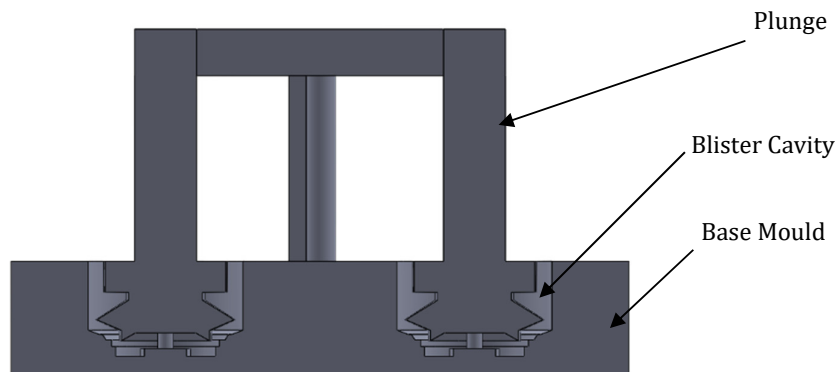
Illustration of the plunger and a base mould design configuration used for making blisters
